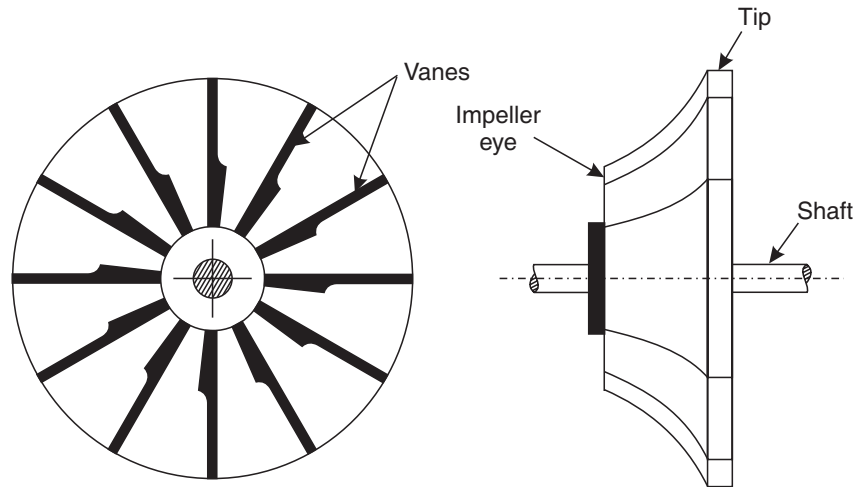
Impeller (single-eyed) and radial vanes of centrifugal compressor.
